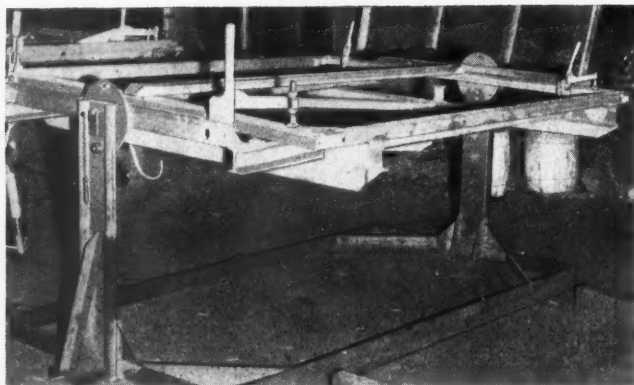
View of jig which was Designed to Hold Door Frames Rigid During Welding.
